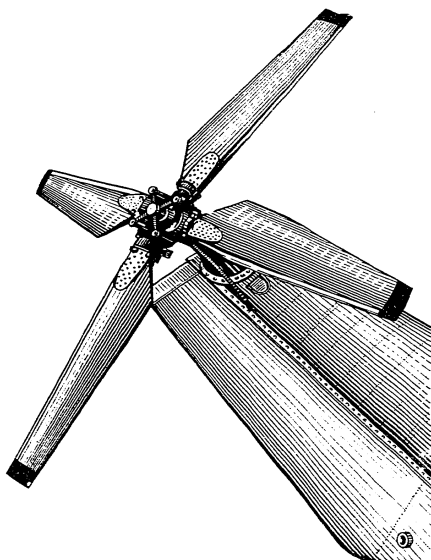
TAIL ROTOR AB-43B-X615 MOUNTED ON TAIL GEAR BOX.
